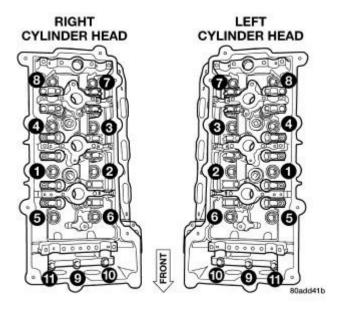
Cylinder Head Tightening Sequence Courtesy of CHRYSLER LLC
